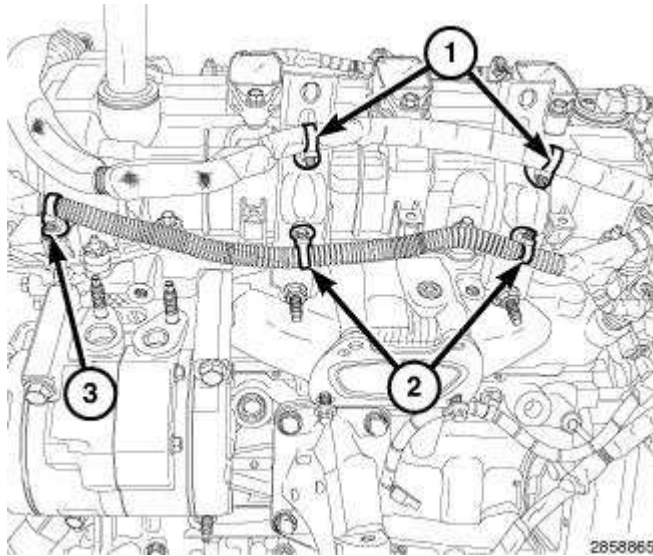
Starter Wire Harness Retainers, Main Wire Harness Retainer & Manifold Support Bracket Retainers
